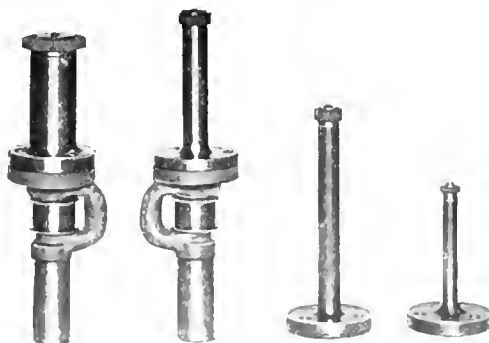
Type of Internal Grinding Spindles used, carried in Detachable Flanged Bearings.
